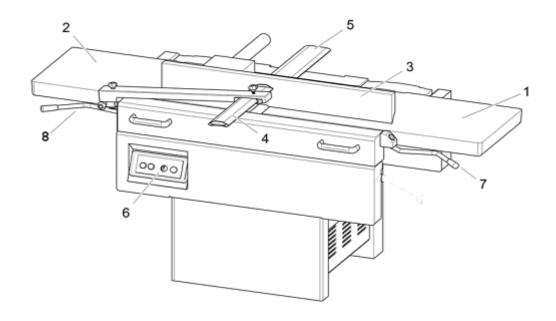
a) — Example of surface planing and thicknessing machine (set up for planing)
